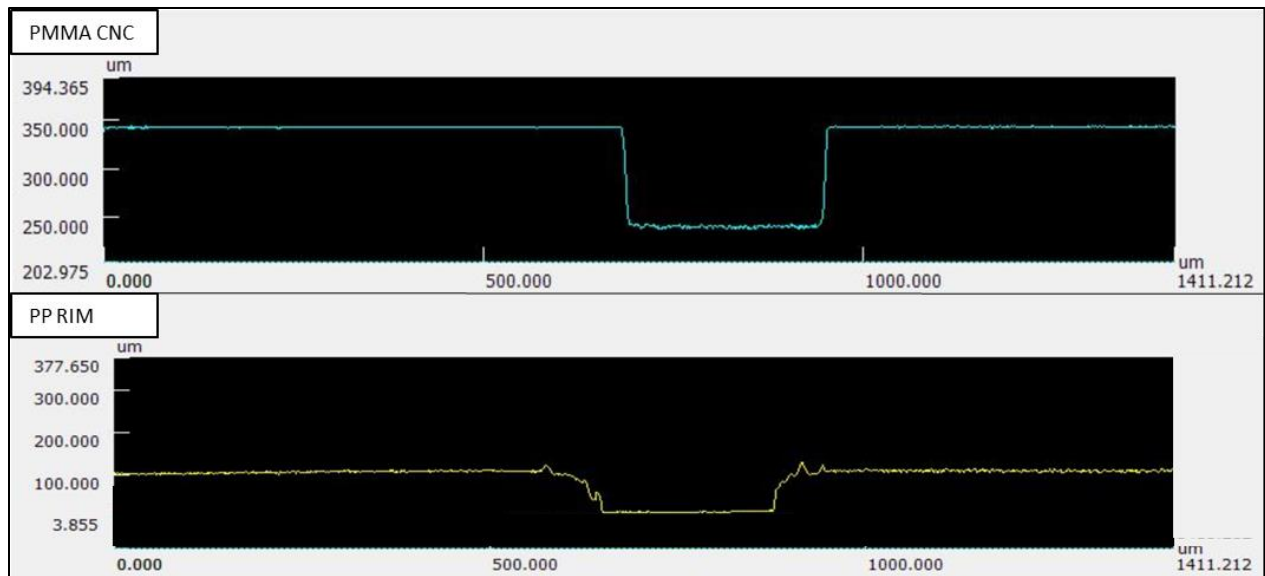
Surface Profile of channel E in a PMMA CNC machined and a PP rapid injection molded part measured with confocal microscope VK-X200K, Keyence, Corp.)
